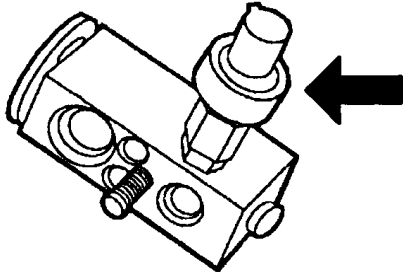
High Pressure Switch (Mounted on Expansion Valve)
